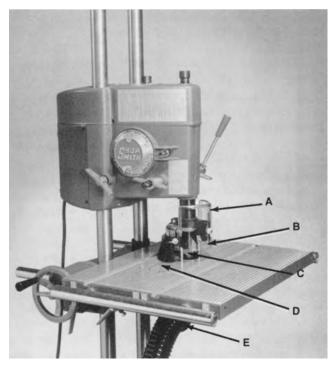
The accessories used for pin shaping are: (A) circular shield and brush, (B) pins, (C) shaper arbor and cutter, (D) shaper insert and (E) dust chute.
